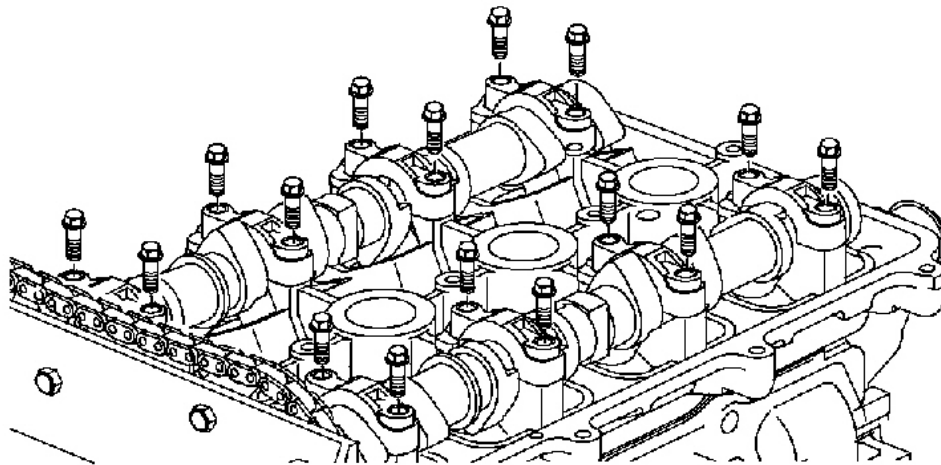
Removing/Installing Camshaft Bearing Cap Bolts
